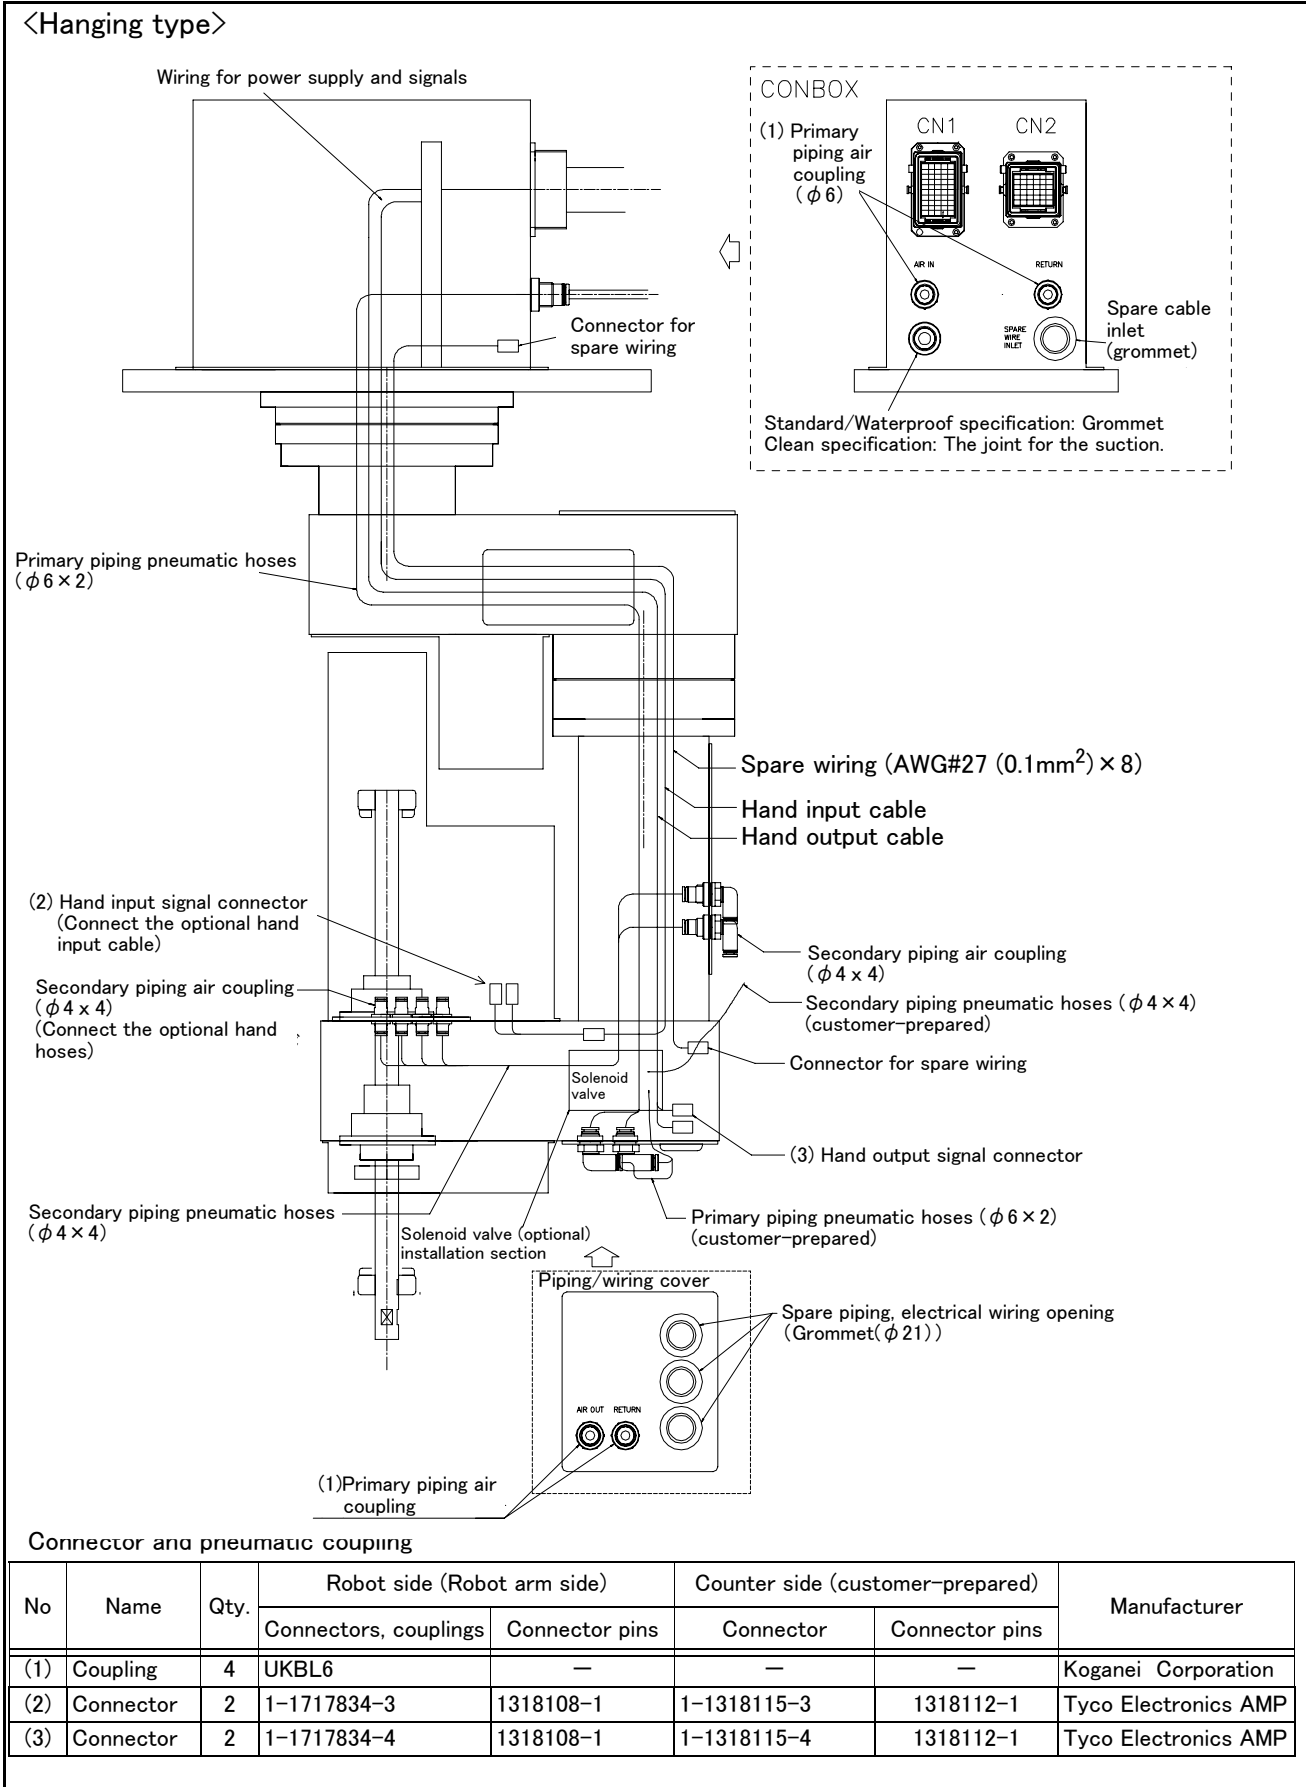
Wiring and piping for hand (Hanging installation type)
